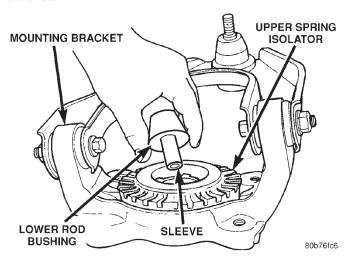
Shock Absorber Rod Lower Isolator Bushing NOTE: If removal of the upper control arm is necessary, refer to UPPER CONTROL ARM in the REMOVAL AND INSTALLATION section of this group.
